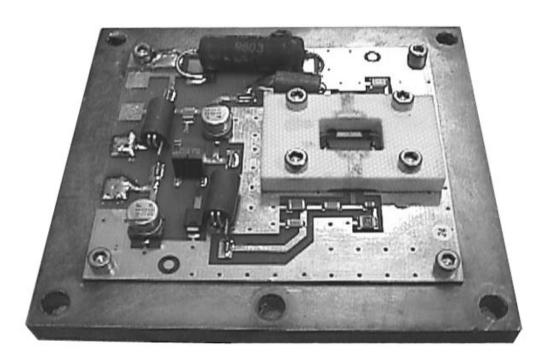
MRF9045MR1 Device Held Down by a Clamp Prior to Soldering
